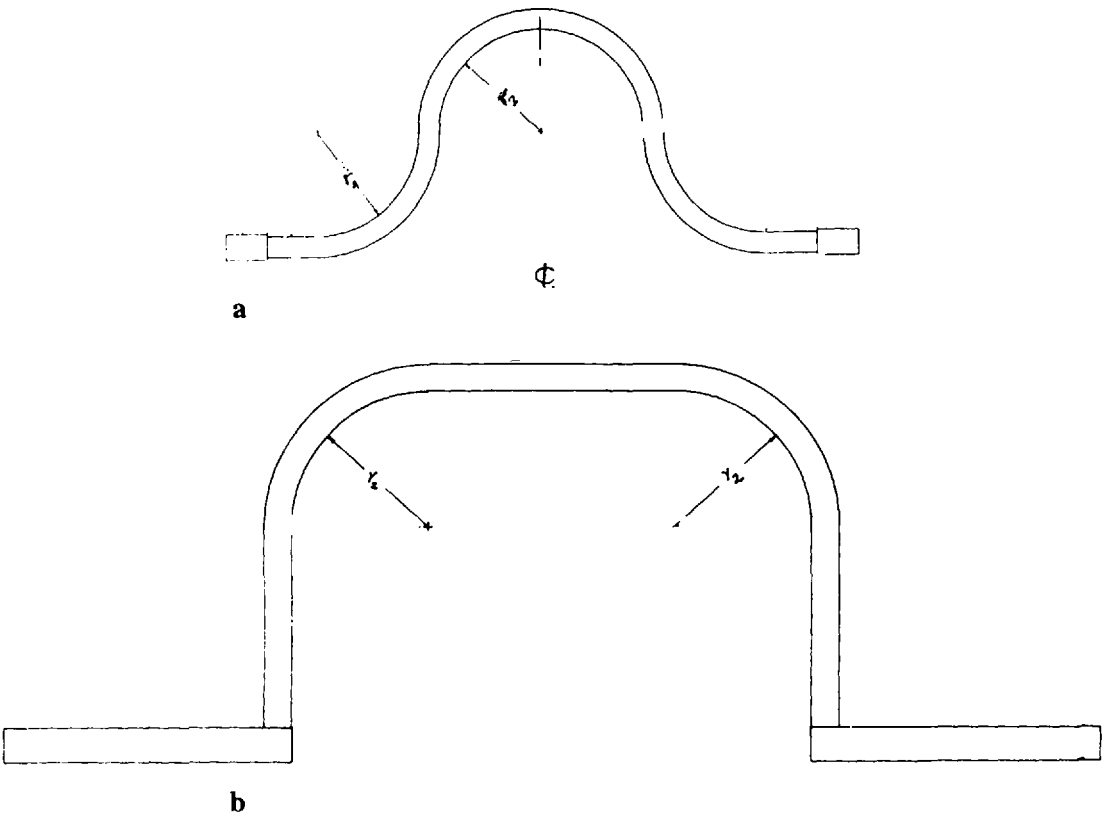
Flanged and flued expansion joint. (After Ref. 41.)
